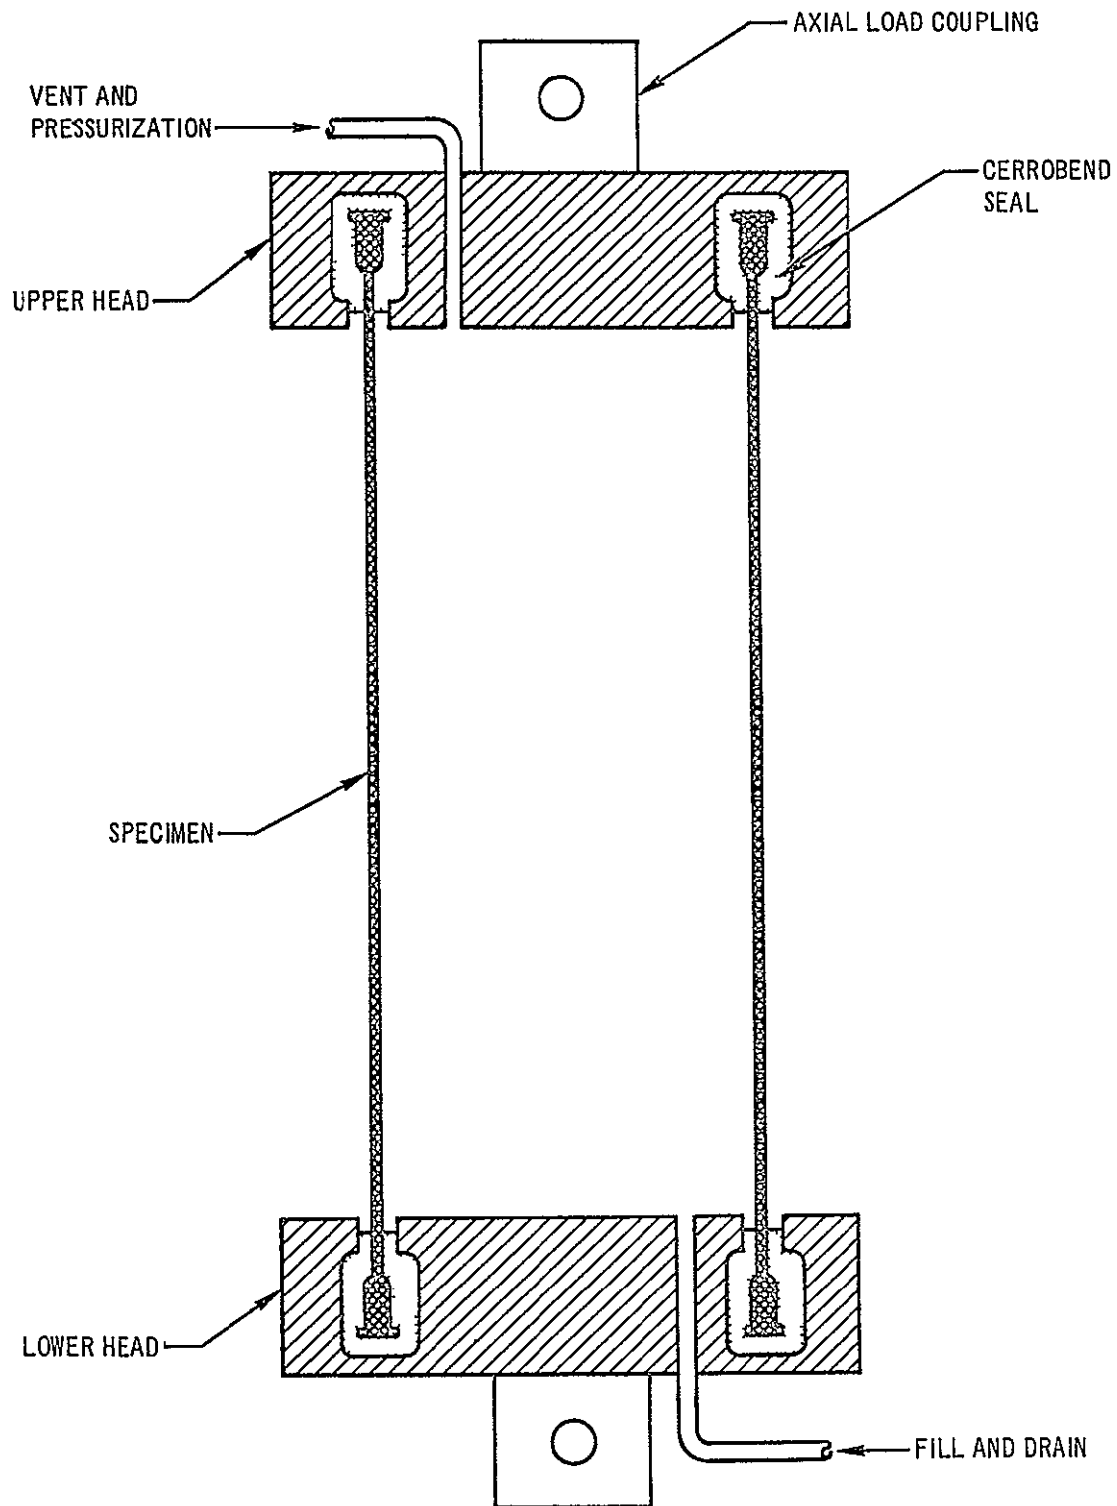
Biaxial Specimen Assembly for Room Temperature Tests
